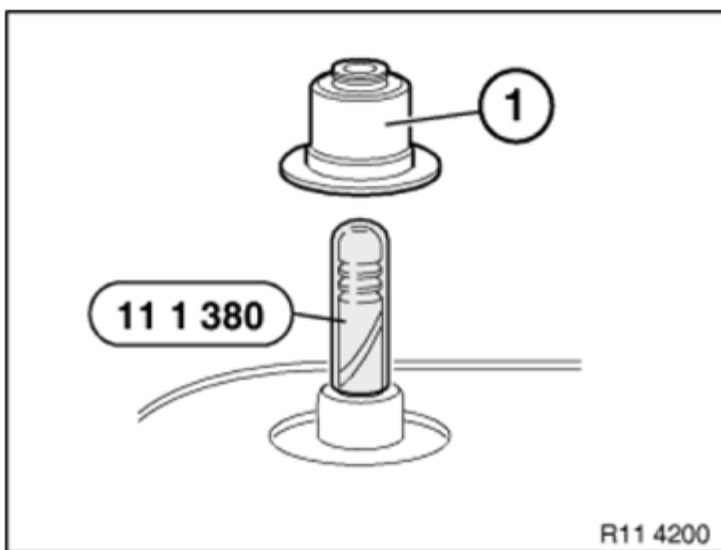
Identifying Valve Stem Seal And Special Tool 11 6 380
